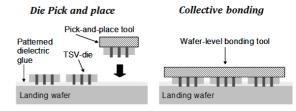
2-Step 3D-Assembly using photo-patterned adhesive
